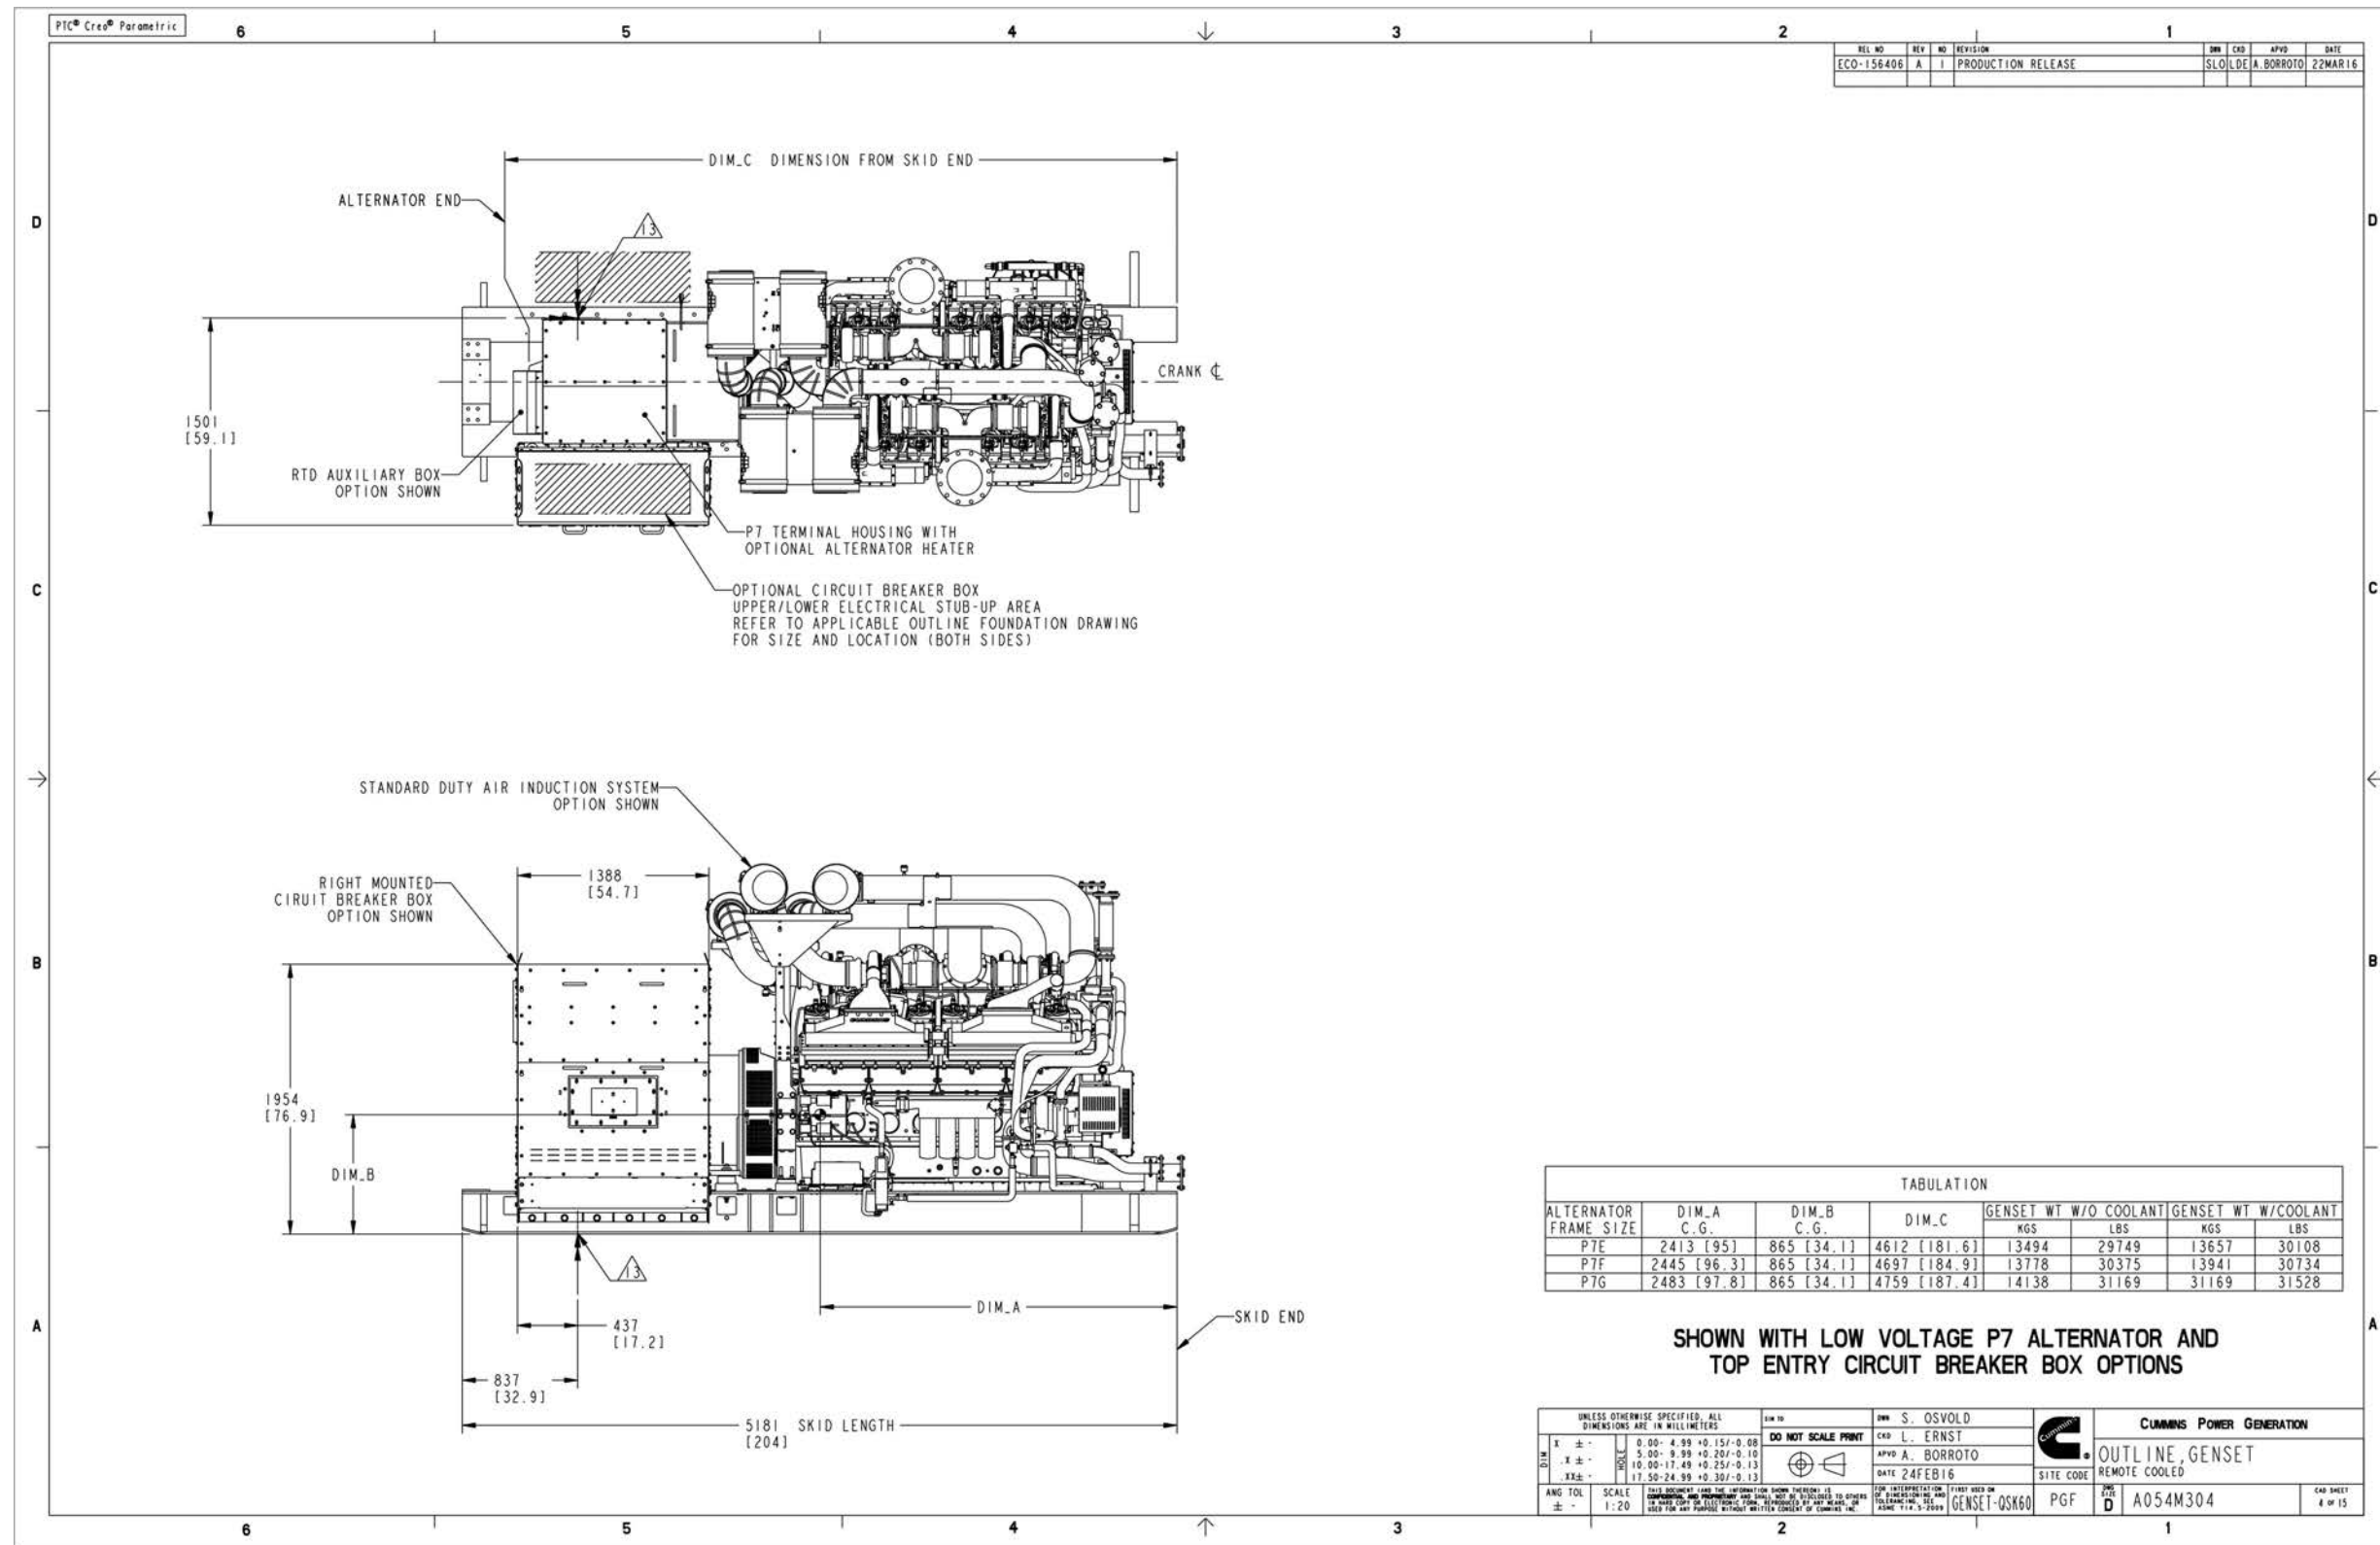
GENERATOR SET WITH REMOTE COOLING OUTLINE DRAWING (SHEET 4)
